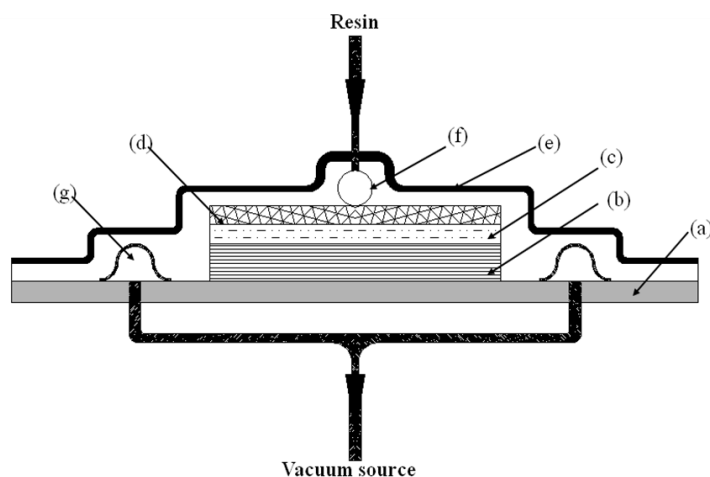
Schematic of VARTM setup (a) Granite molding tool, (b) Dry Basalt fabrics, (c) peel ply and breather material (d) distribution medium, (e) Vacuum bag (f) resin inlet (g) vacuum outlet.
